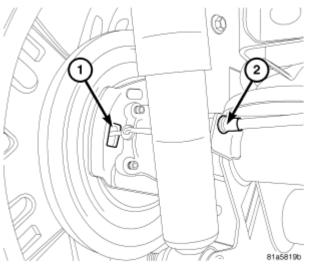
Identifying Brake Lever & Brake Cable Courtesy of CHRYSLER LLC
